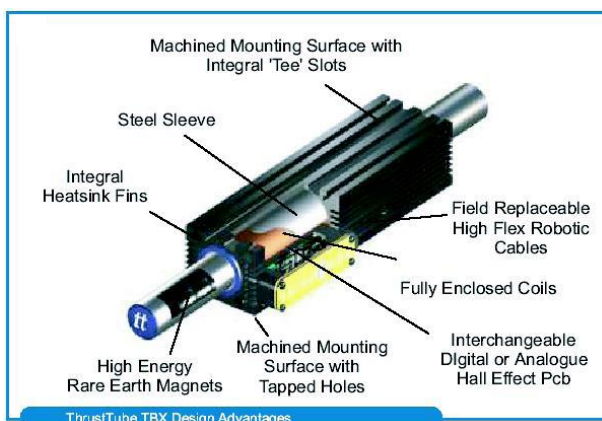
Linear motor basic design (manufacturer spreadsheet)
